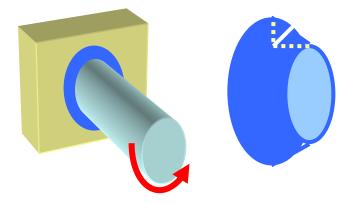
Design of a fillet weld for torsion
